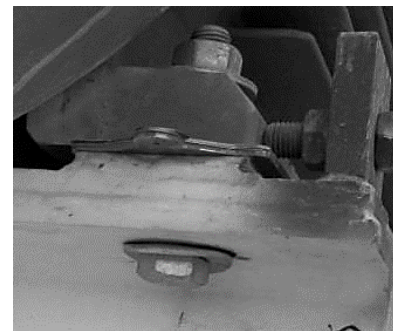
Motor Hold Down Bolts, Oversize Flat Washers Deformed Into the Base Plate Holes.
